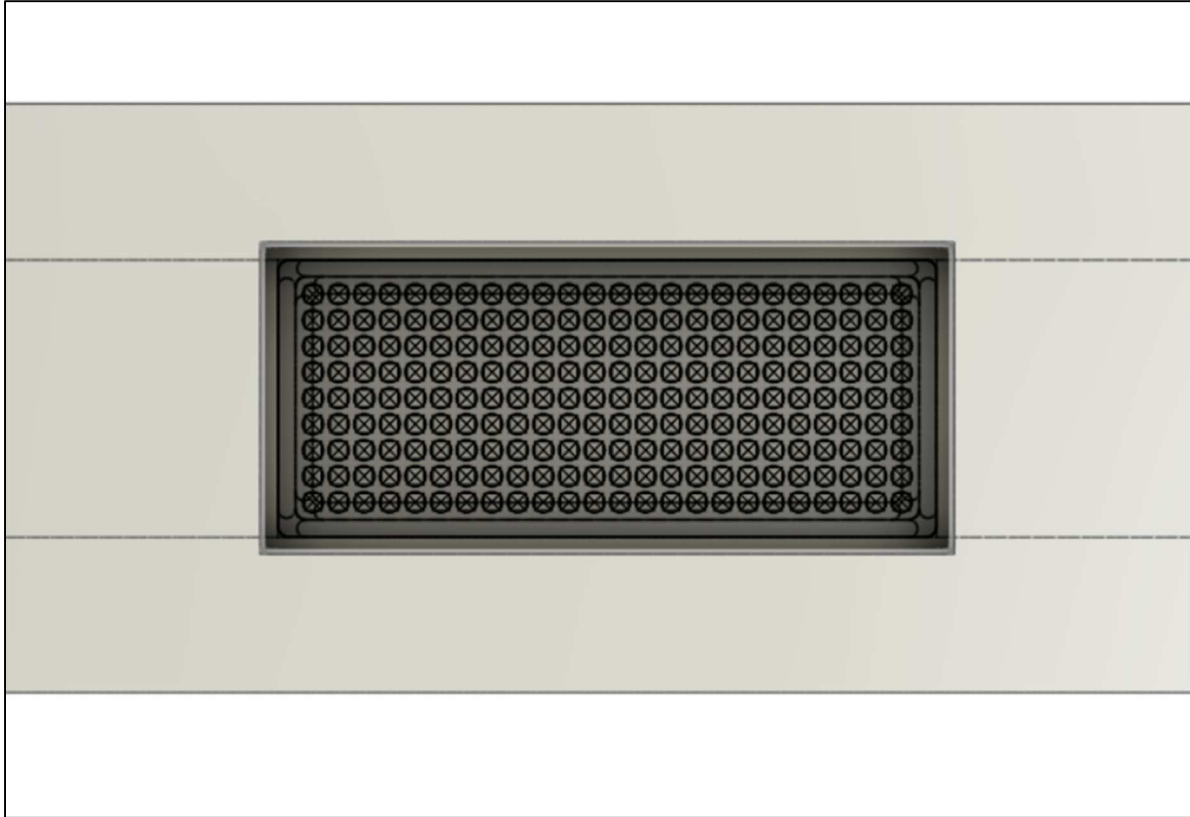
Electro spray thruster integrated to rail section CAD (close-up).
